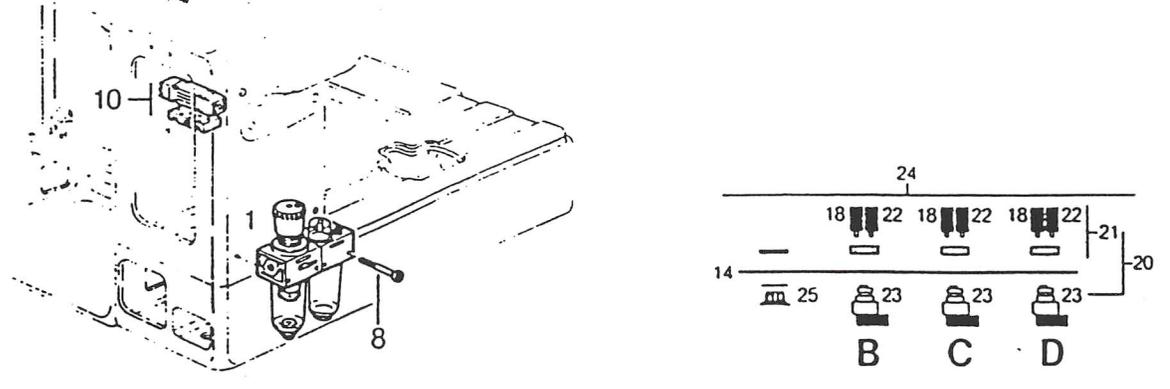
PNEUMATIC SWITCHES AND TABLE DISTRIBUTORS
